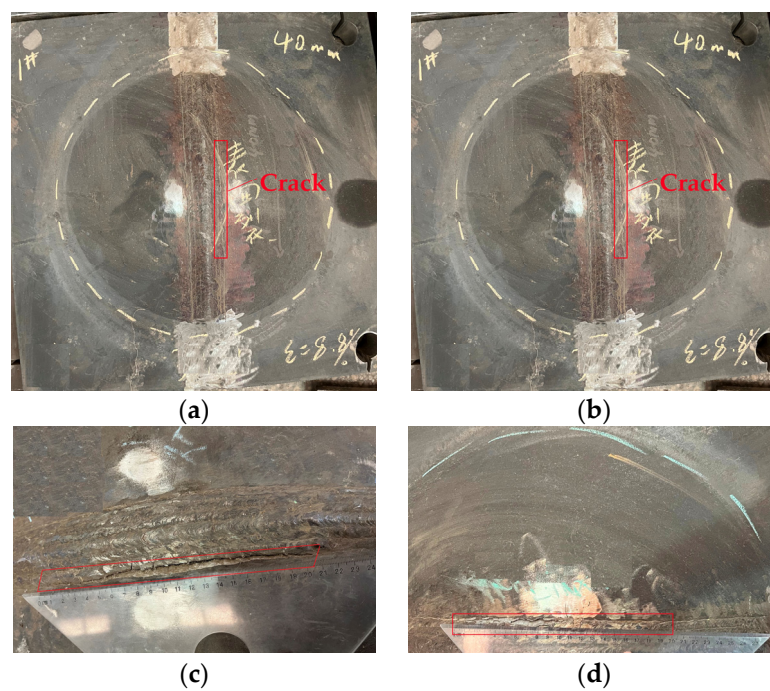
Butt joint plates after explosion test: (a) explosive bulge test plate 1; (b) explosive bulge test plate 2; (c) crack length of test plate 1; (d) crack length of test plate 2.
